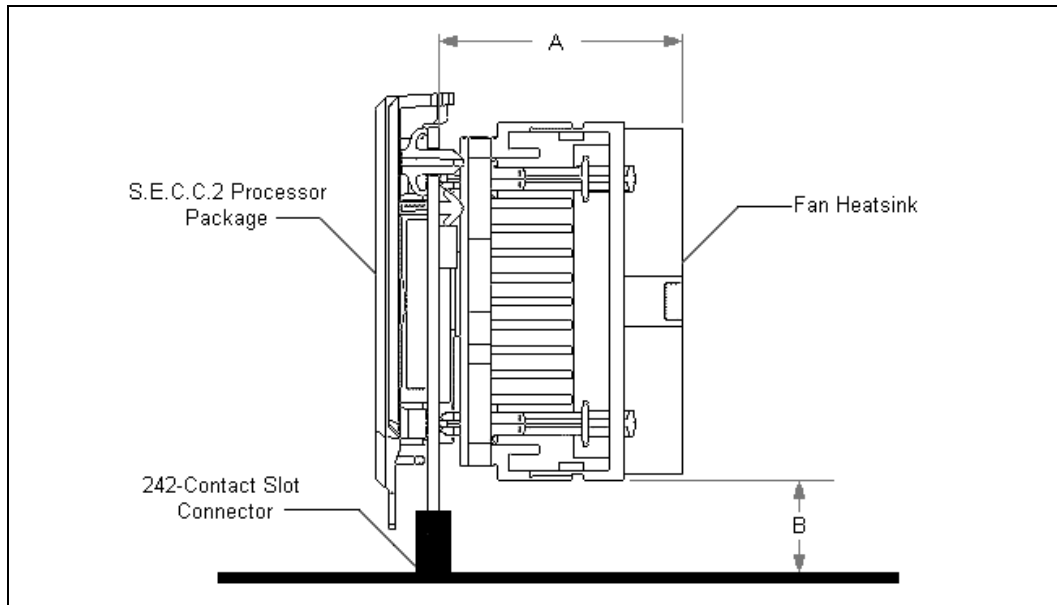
Front View Space Requirements for the Intel® Boxed Processor with S.E.C.C.2 Packaging
